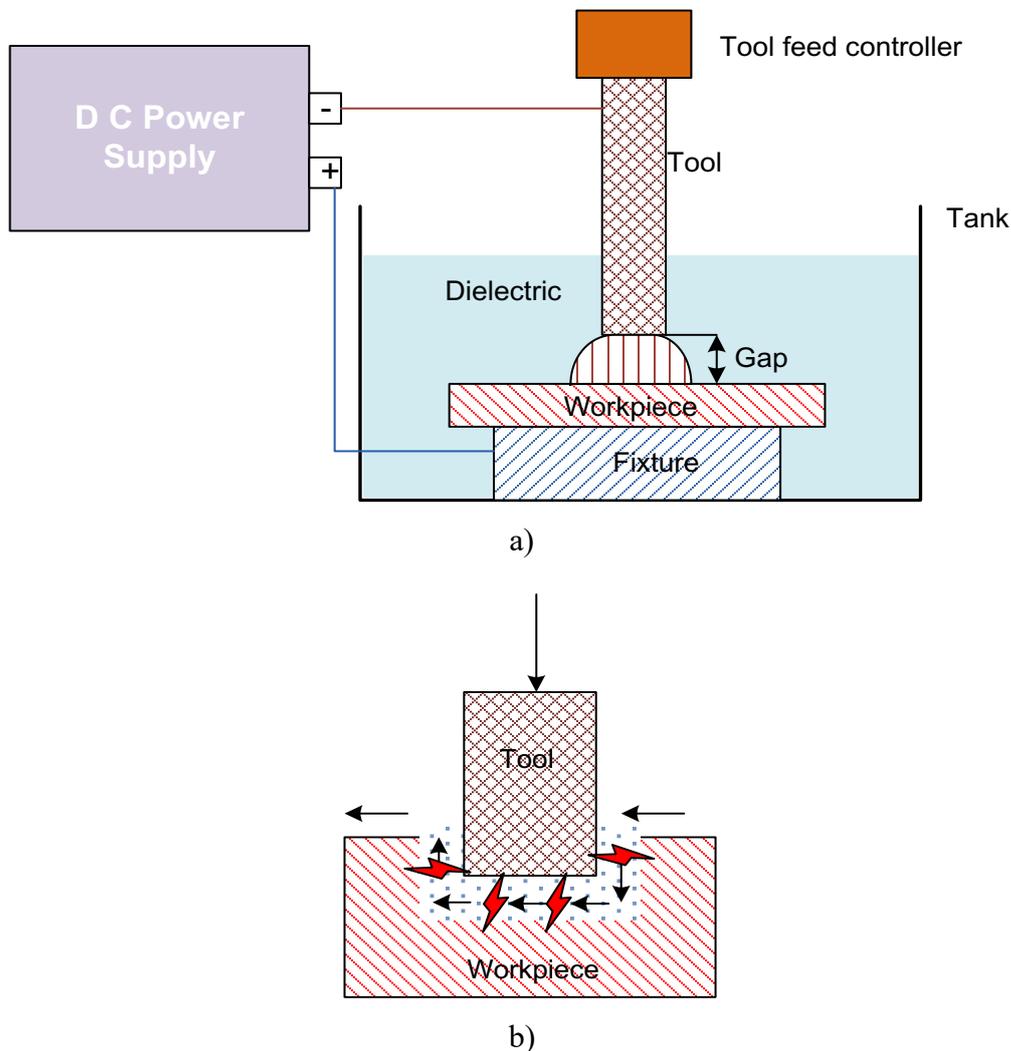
Schematic showing a) electric discharge machining system with main components and b) closer look of machining zone.
